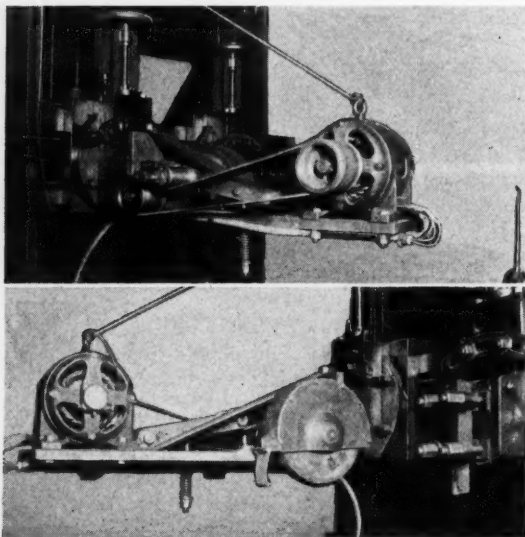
Right and Left Hand Sides of Grinding Attachment
